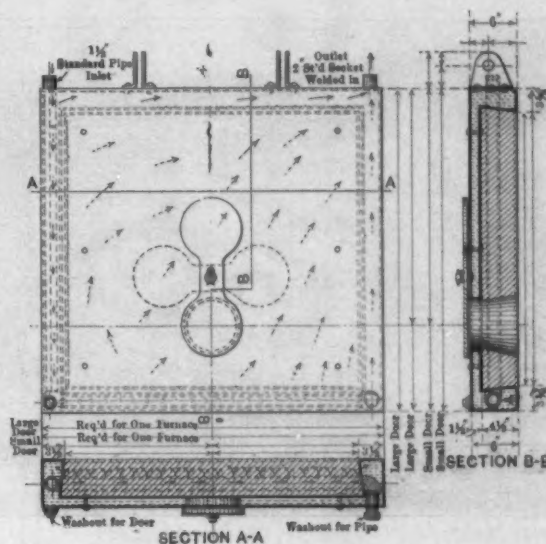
Welded Steel Water Cooled Door.
